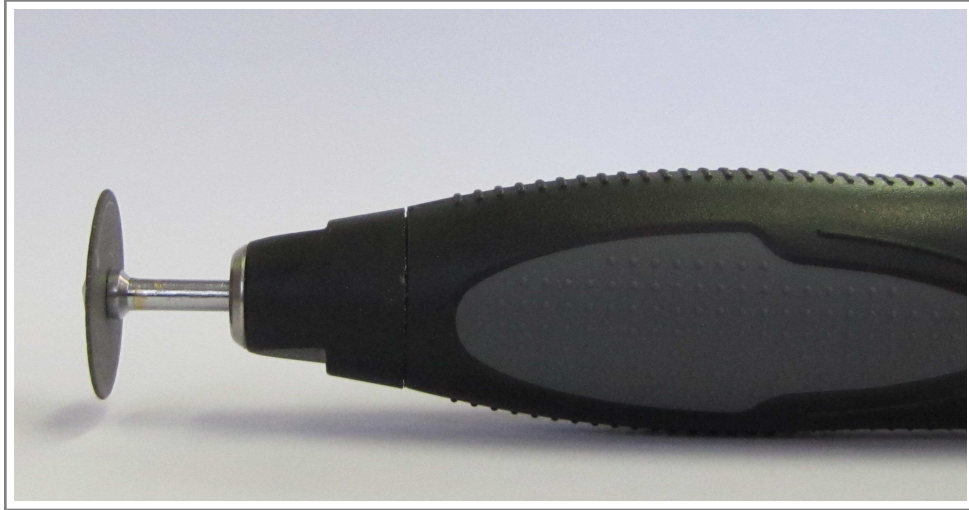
Aluminium oxide cutting disc and Dentalarm micro motor
